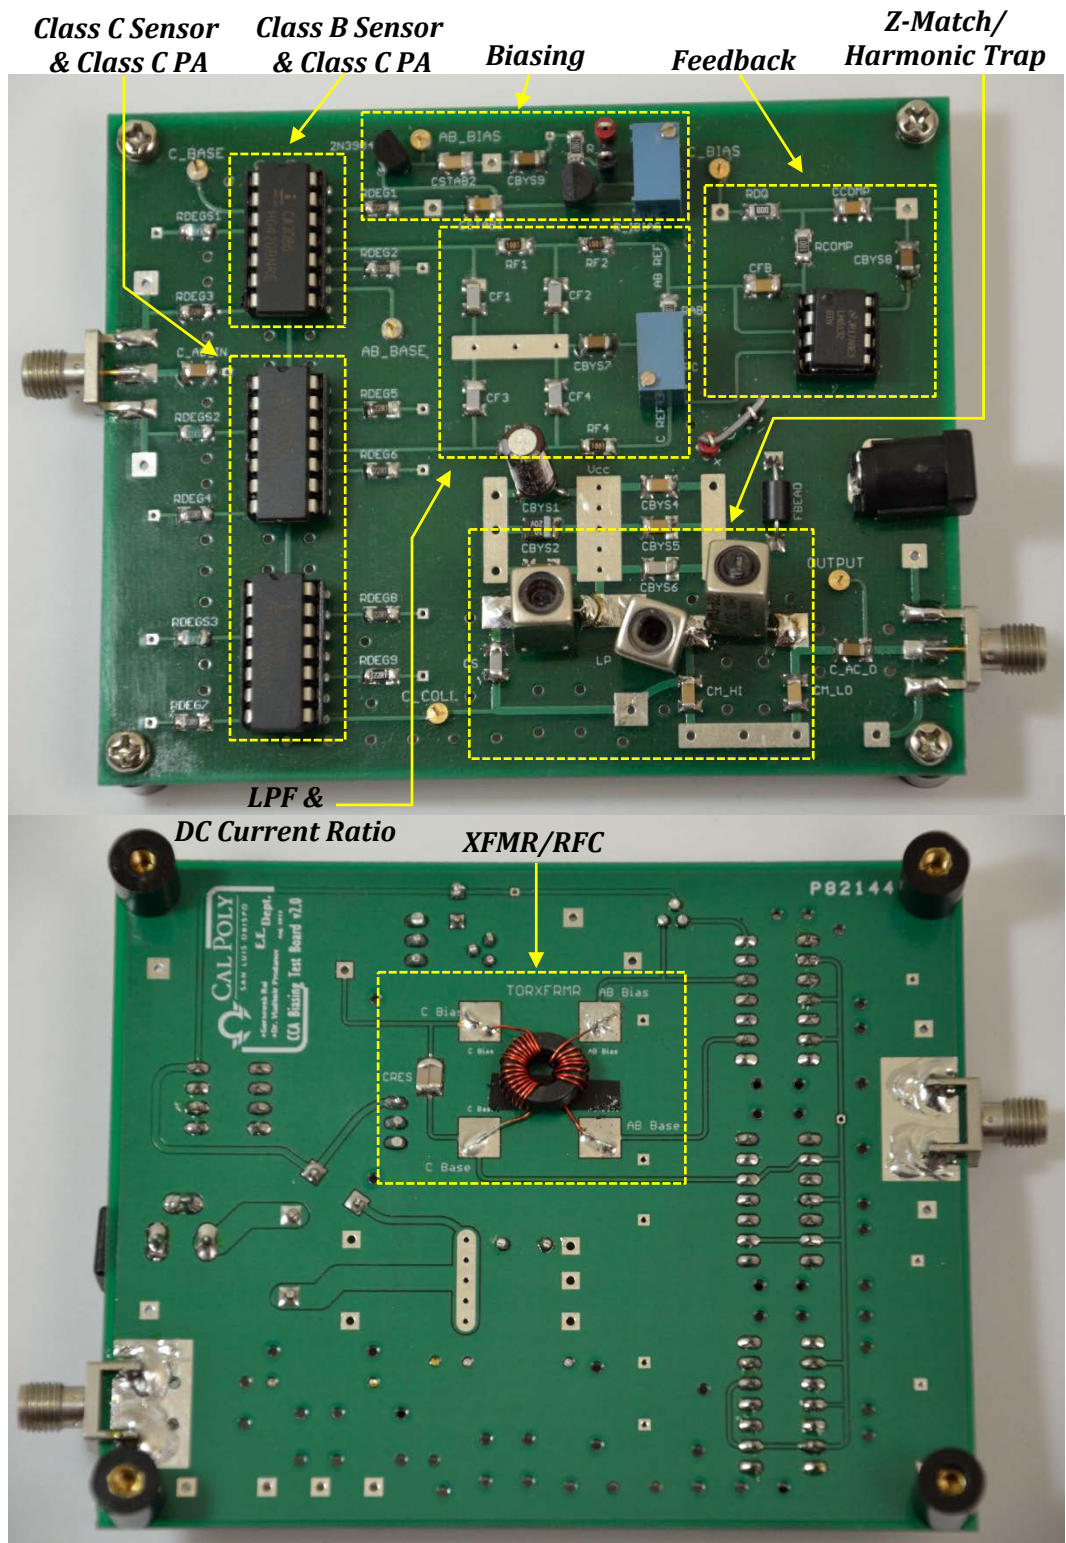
Top and bottom, respectively, of final PCB CCA biasing prototype.
